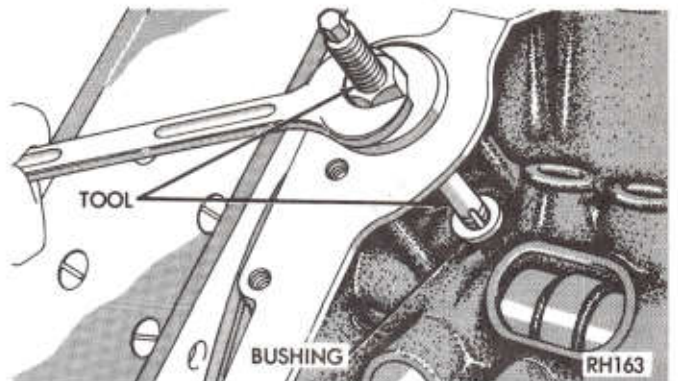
Removing Distributor Driveshaft Bushing with Tool C-3052
